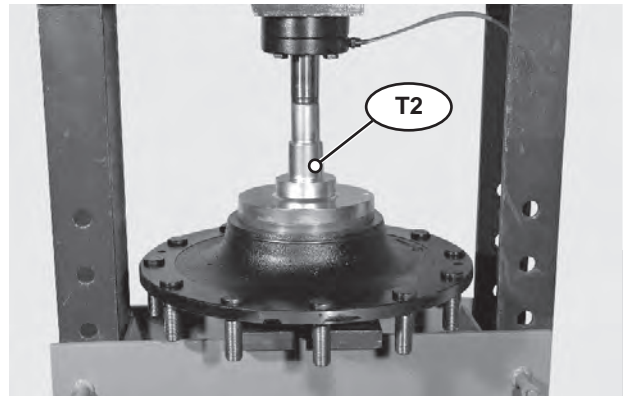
Position tool T2 (See drawing T2 p. 26) and press the sealing ring (19) into its seat. Check the flatness of seal ring.
